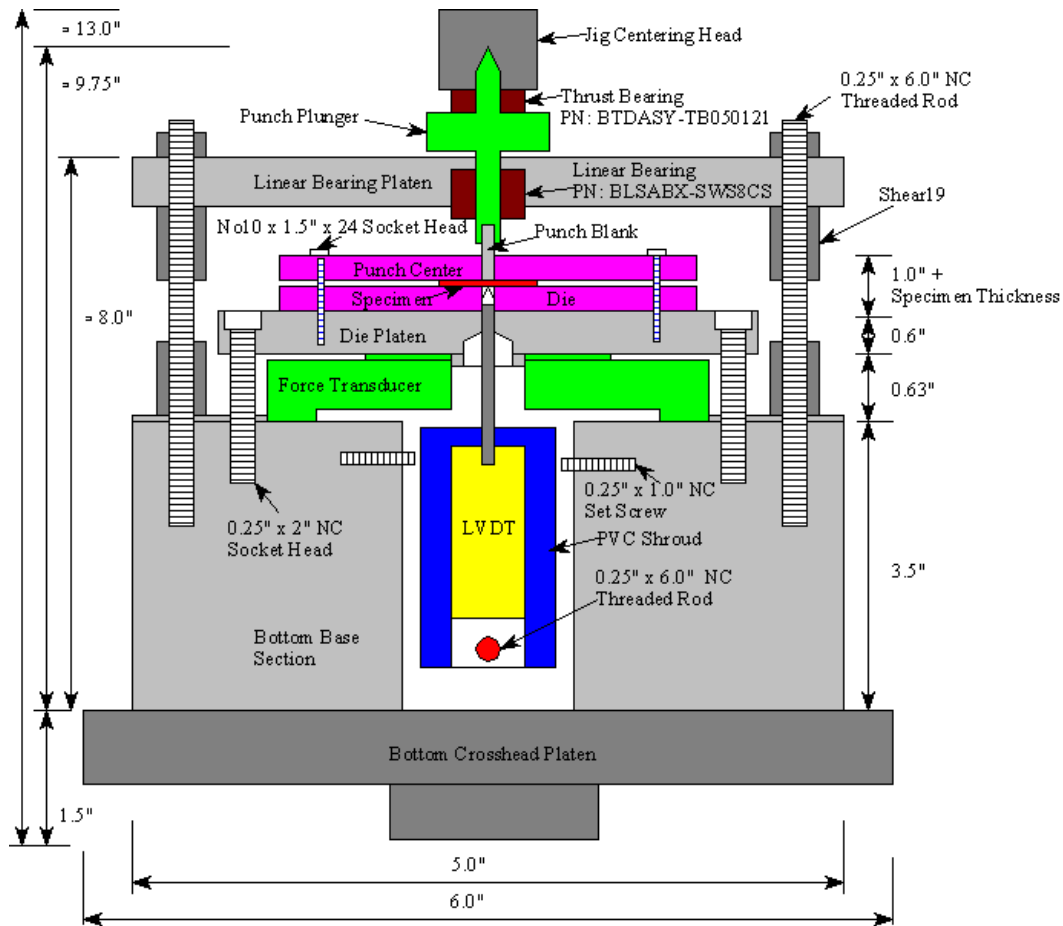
Schematic showing the general design of the shear punch test fixture fabricated to meet the requirements.
